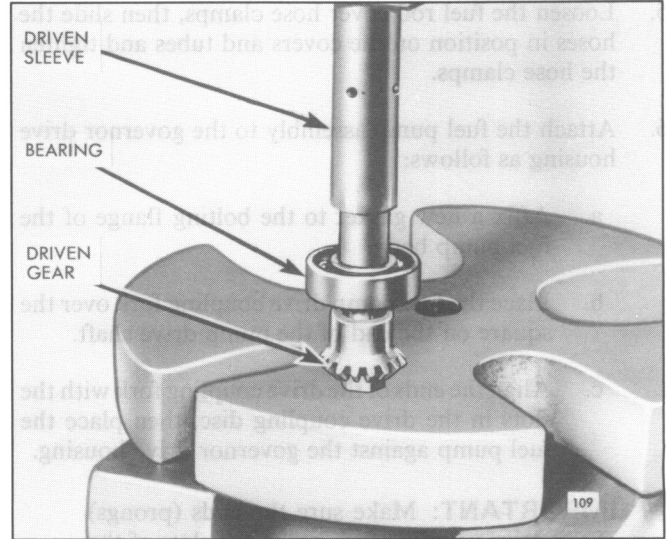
Installing Bearing and Driven Sleeve on Driven Gear
